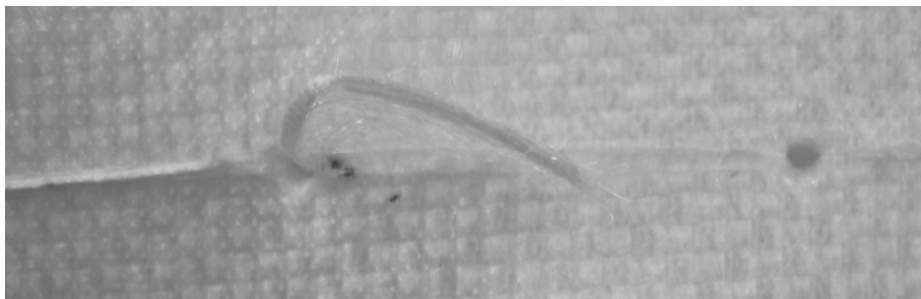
Bobbin stitch failure on the lower facesheet preceding sandwich failure.
